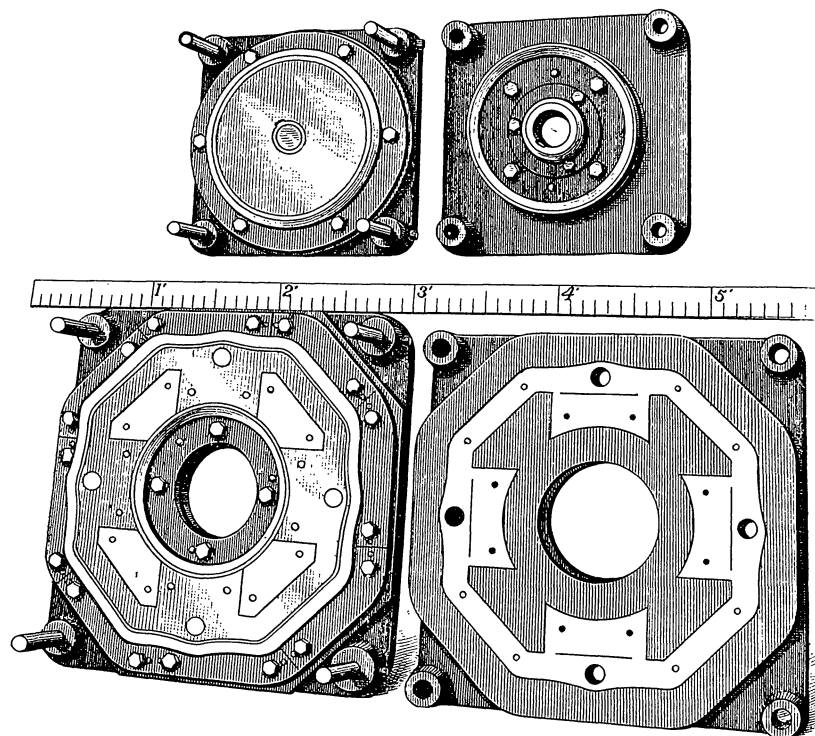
Dies for Cutting Ring and Armature Blanks.
